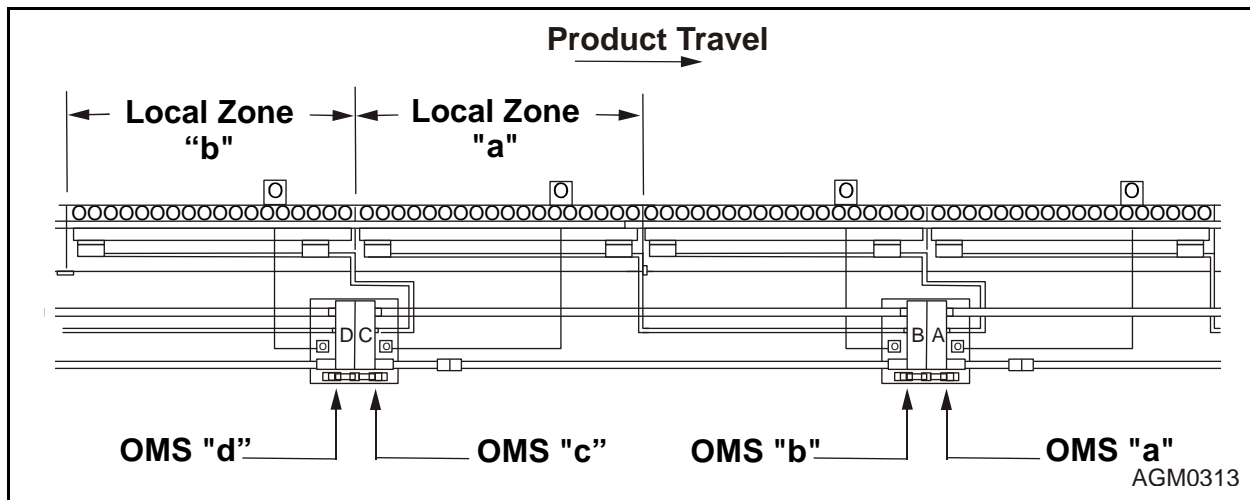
13 Local Zone Control-Setting Solenoid Valve Zone Control
